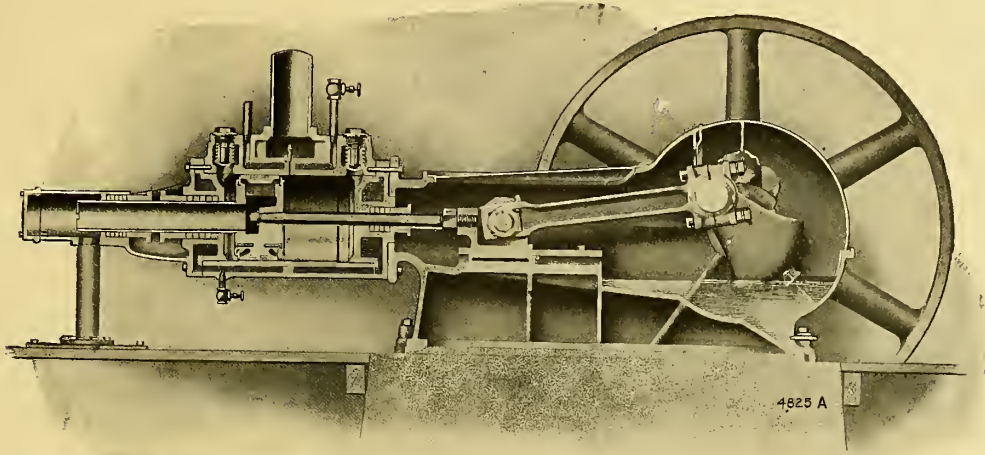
LONGITUDINAL SECTION OF STANDARD CLASS "NE-1" INGERSOLL-RAND COMPRESSOR WITH "HURRICANE-INLET" AND "DIRECT LIFT" DISCHARGE VALVES.
